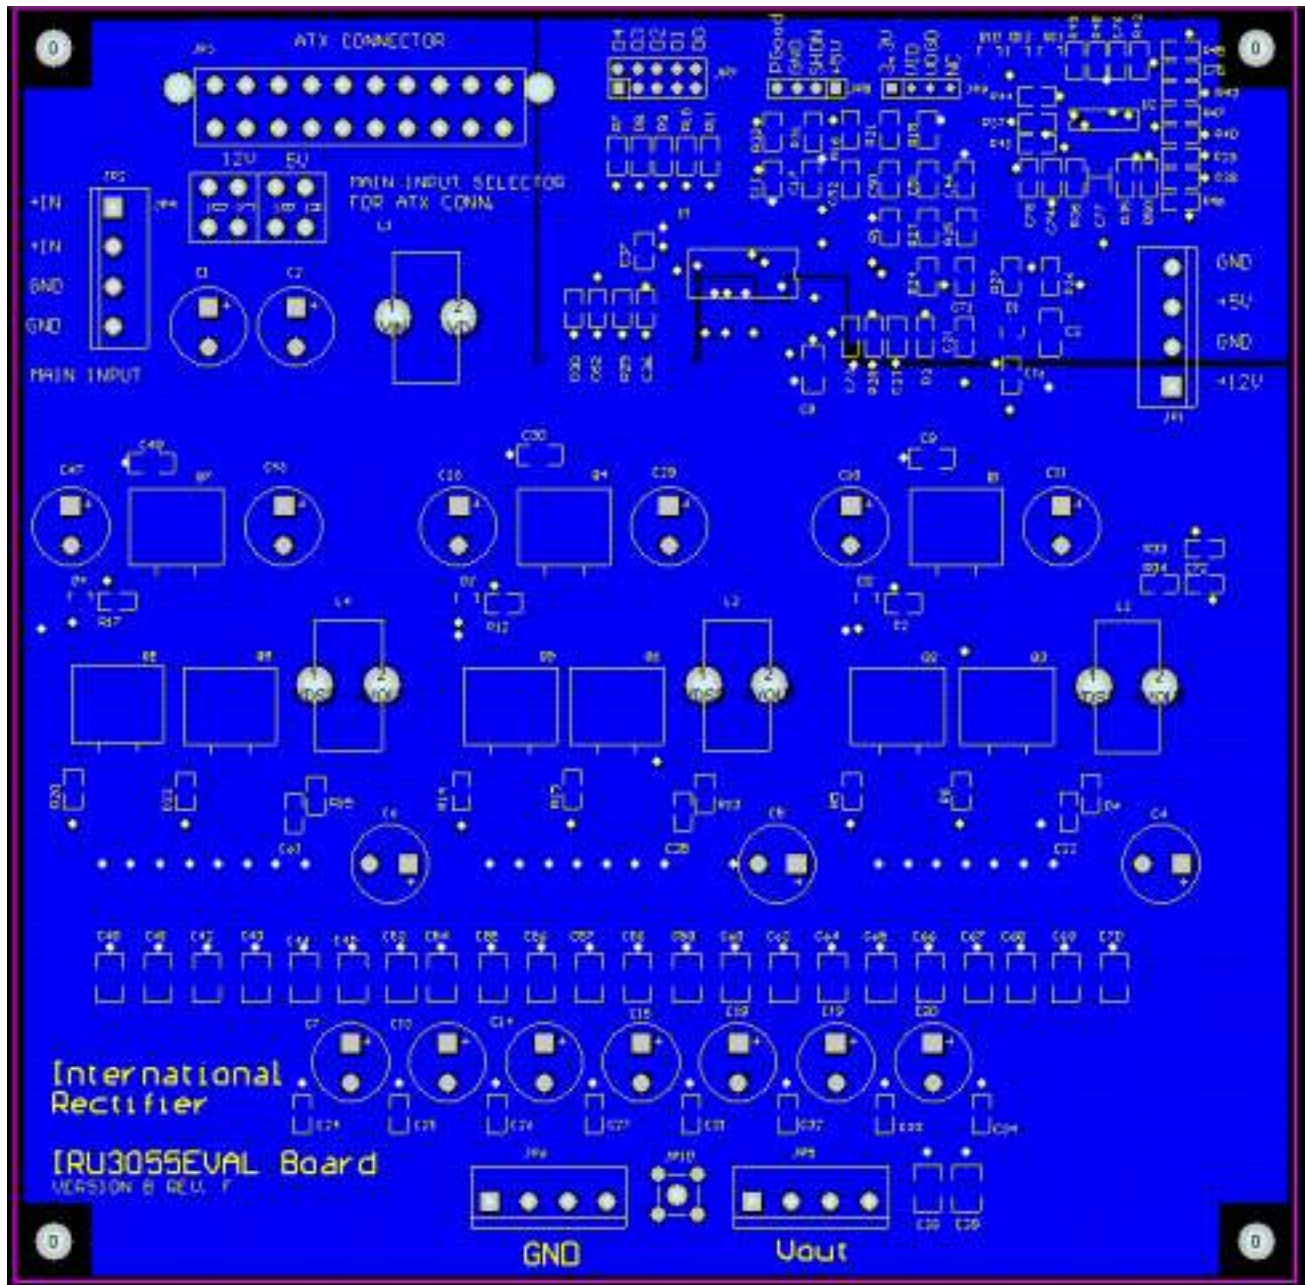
The bottom layer of IRU3055 demo-board PCB layout.
